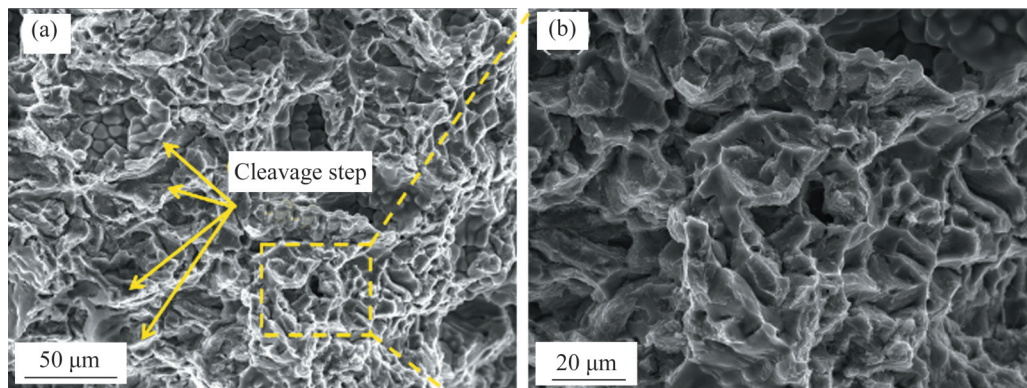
(a) SEM image of WJ tensile fracture; (b) Local enlarged view of Figure 8(a)
